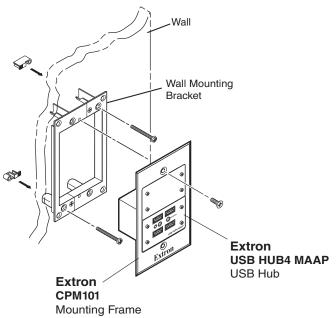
Mounting a USB HUB4 MAAP to a Mounting Bracket
